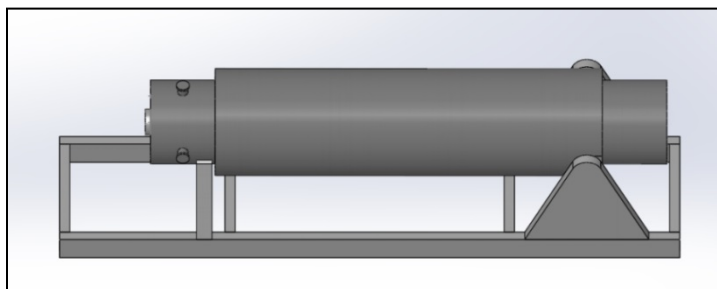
Cradle used for both LWT® cask and the transfer cask.
